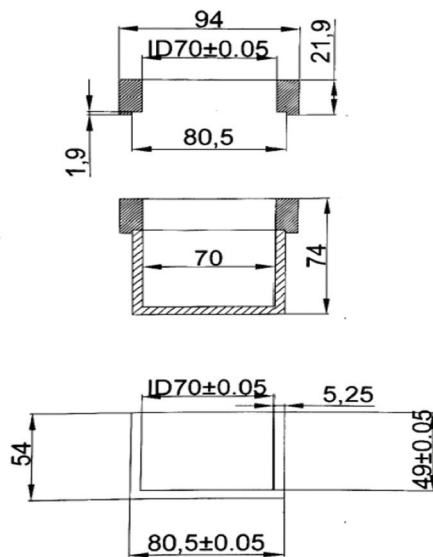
(a) Dimensions and (b) geometry of the fabricated mould that was used in the study.
